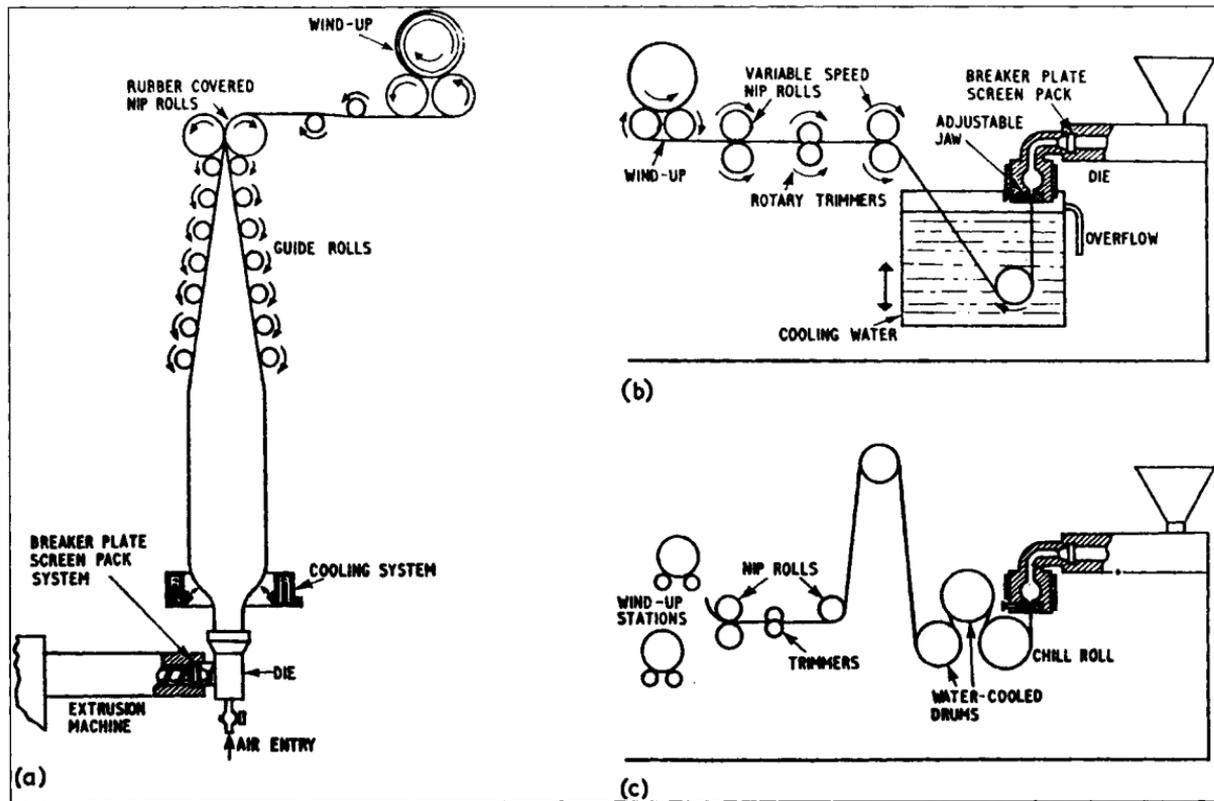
Methods of producing polyethylene film: (a) tubular process using air cooling; (b) flat film process using water bath cooling; (c) flat film process using chill roll cooling¹⁰
